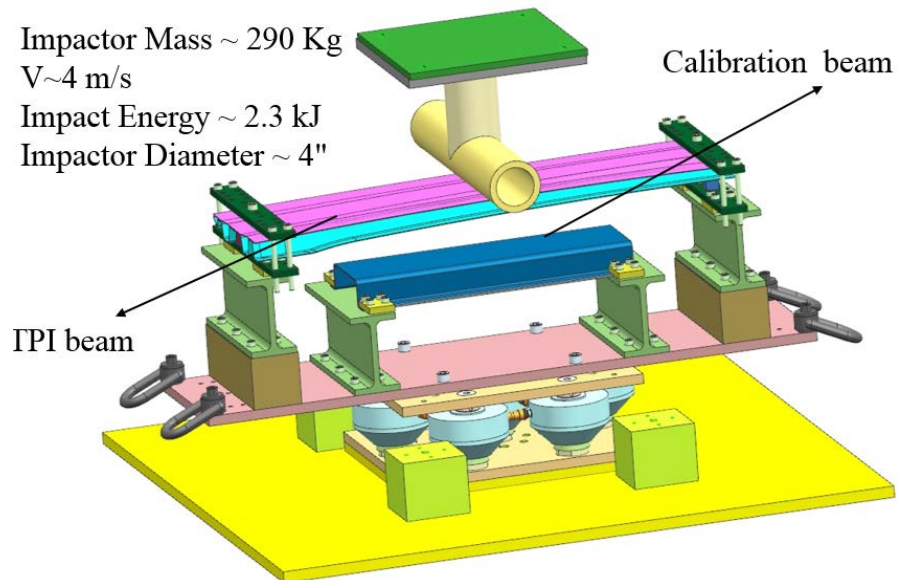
C.18. Impact test fixture. Source: OEM Partner.
